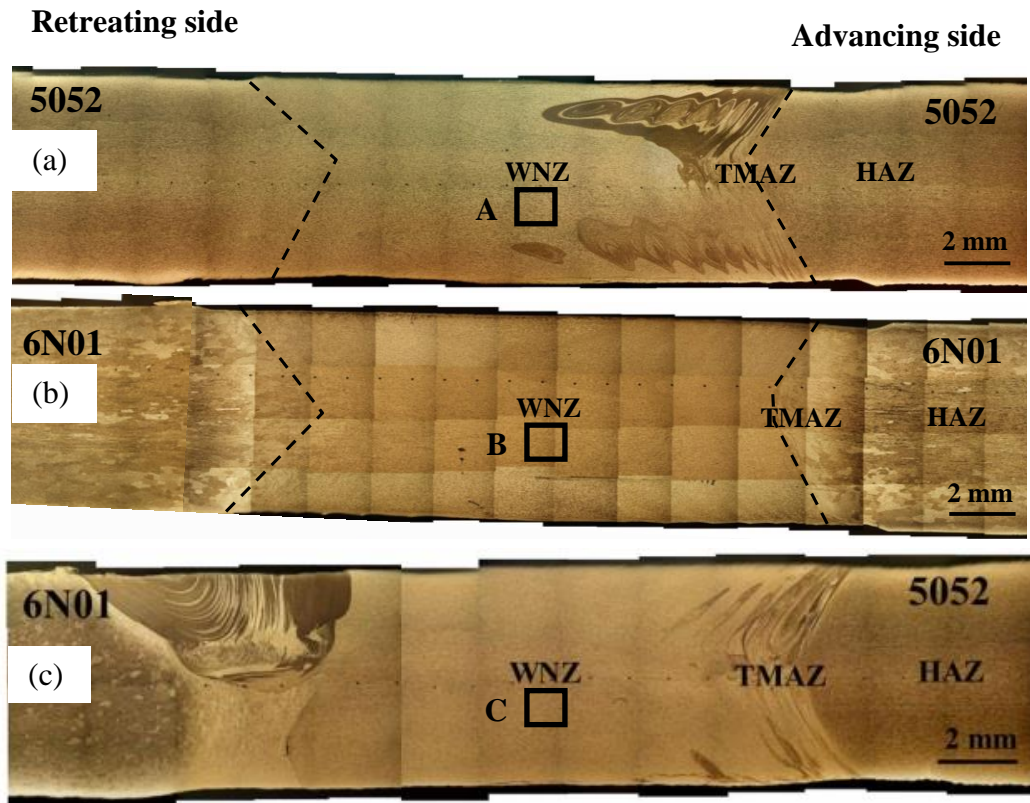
Welded structure in transverse cross-section of (a) 5052, (b) 6N01 and (c) 6N01-5052 FSWed joints.
